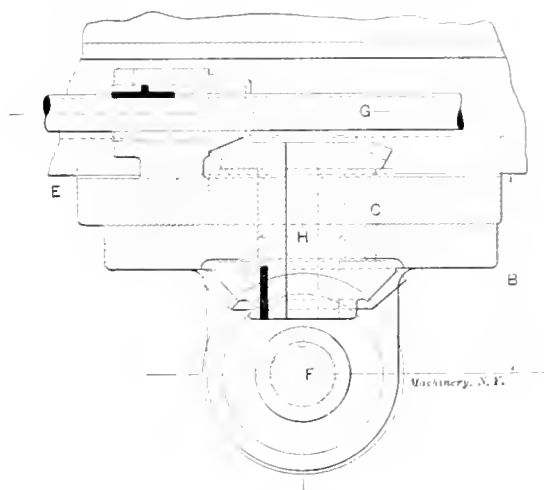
A Common Form of Drive for Radial Drill Spindles
